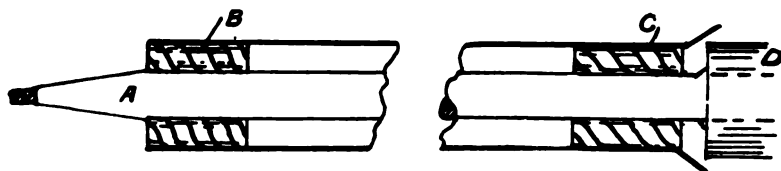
THE LIVE AXLE EQUIPPED WITH ROLLER BEARINGS
